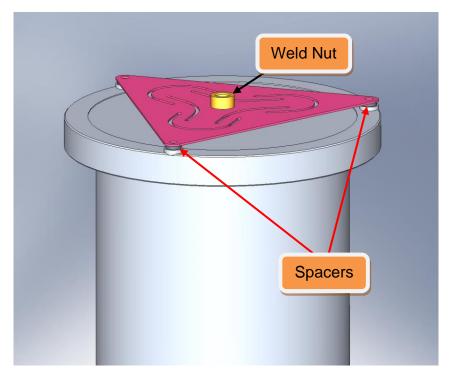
Stabilizer Assembly resting on back end of GS-13 Pod.
